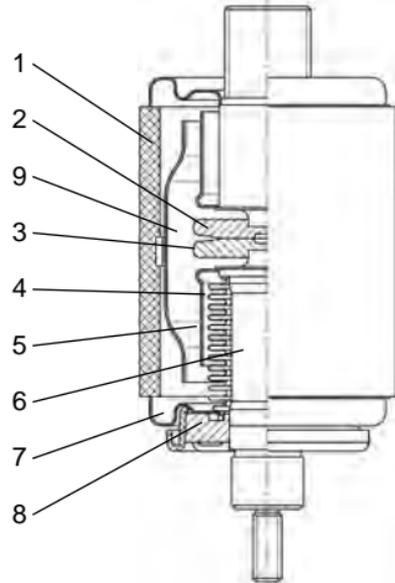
shows the most important components of a vacuum interrupter of the ABB range in sectional view. All joints of the conducting path and of the enclosure are manufactured by brazing in vacuum furnaces with inserted brazing material rings. This results in an extremely reliable and long-lasting seal.
